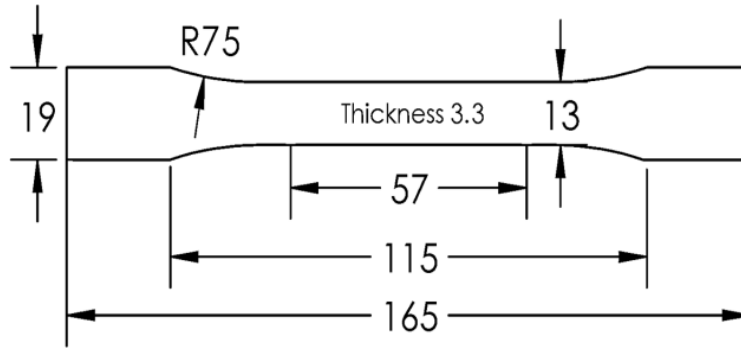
Standard specimen for tensile test, dimensions are in mm
